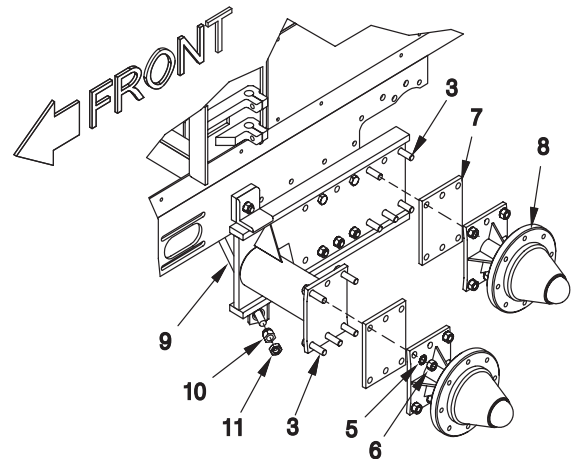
Mounting Spacer Plates Hubs & Truss Rod
